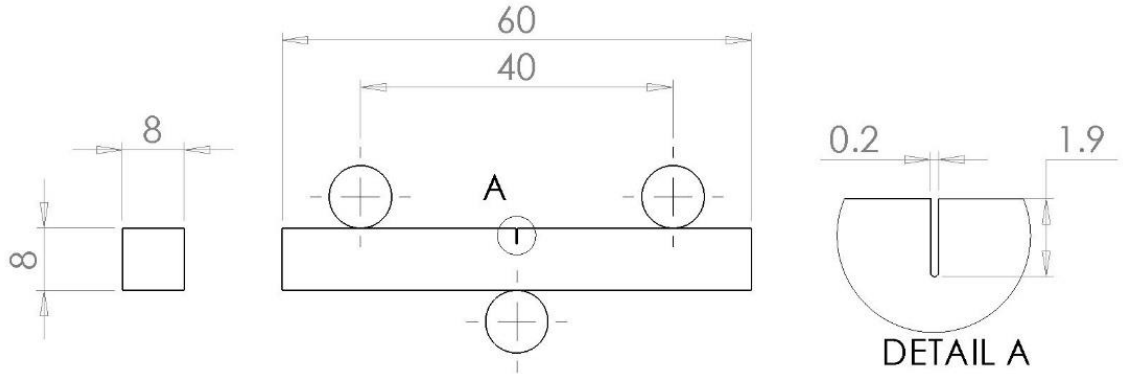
SEN sample dimensions and 3-point bending set up for long crack testing of FV566.
